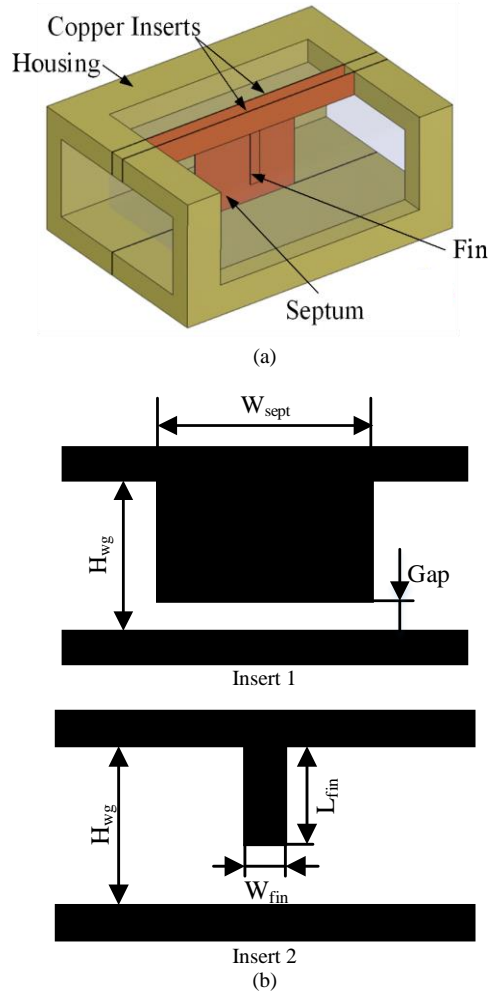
Arrangement of E-plane inserts within a waveguide housing for the proposed E-plane singlet: (a) configuration of the assembled module; (b) configurations of the inserts.
